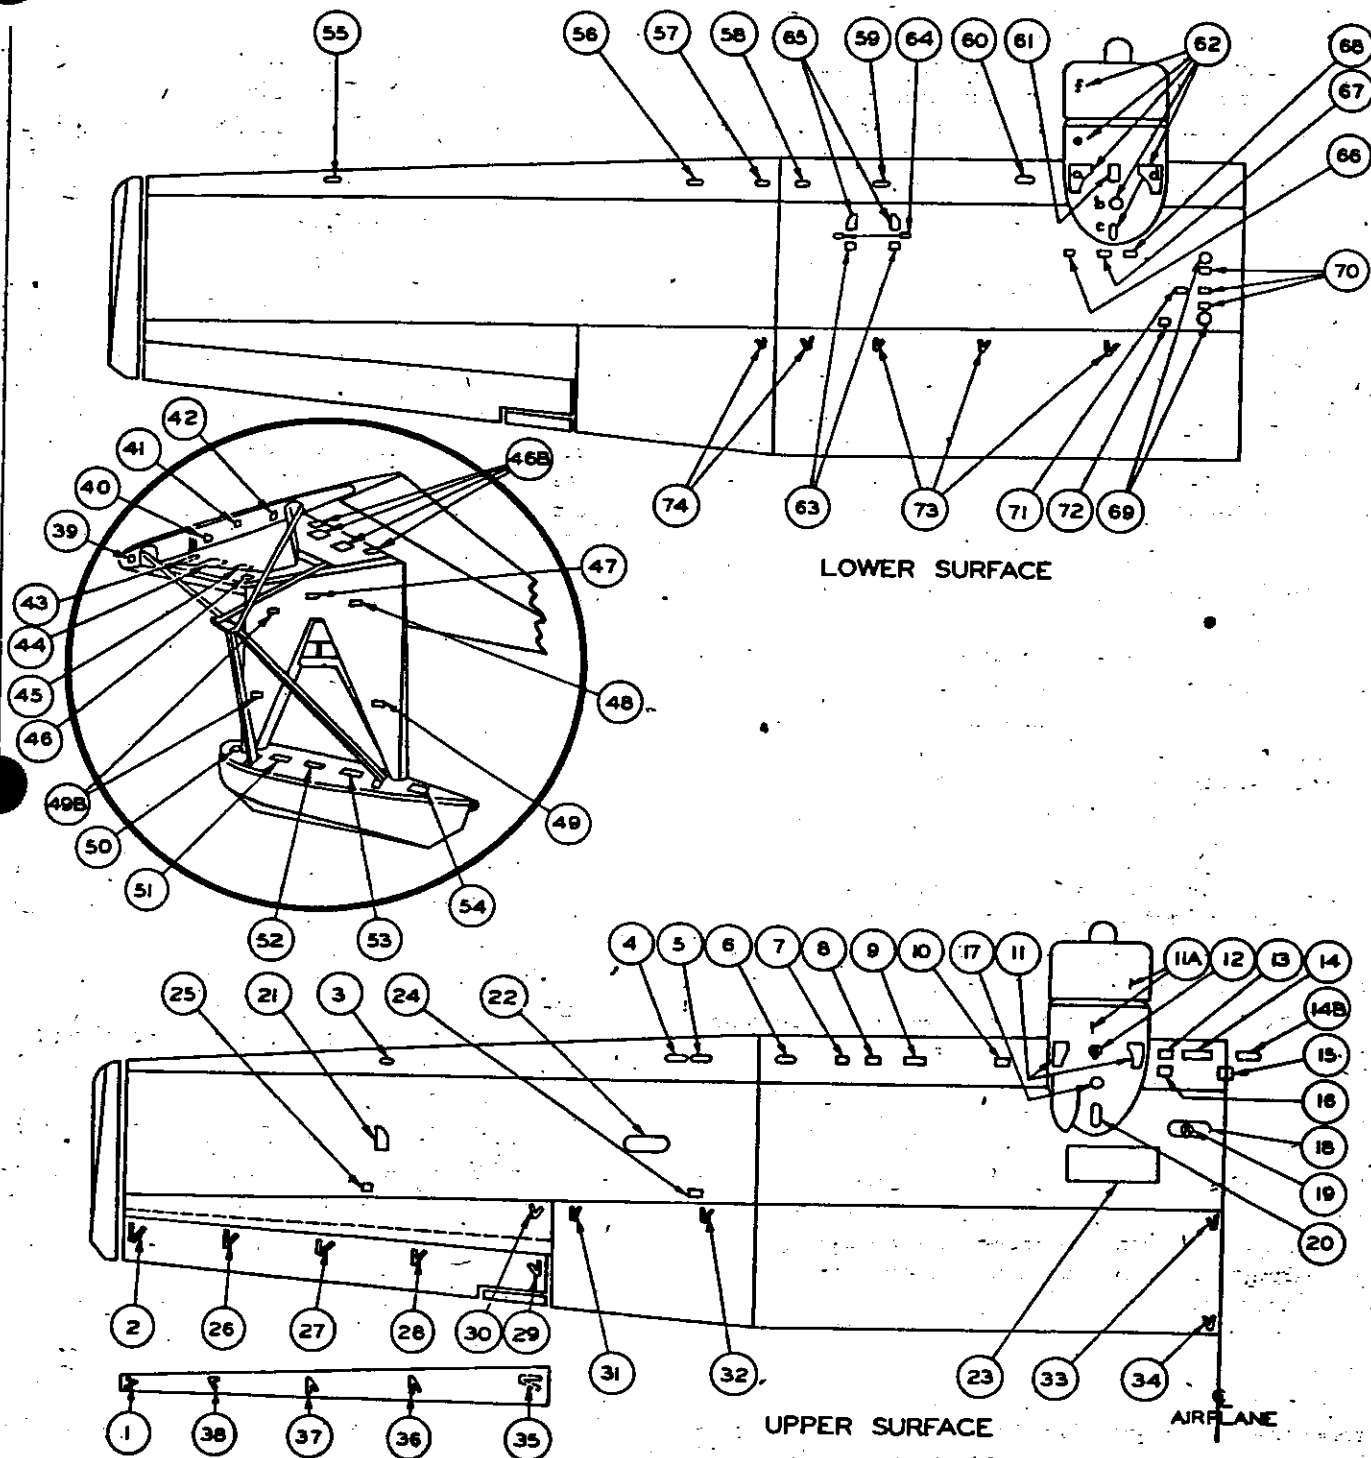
(Sheet 1 of 2 Sheets)—Wing Access Doors
